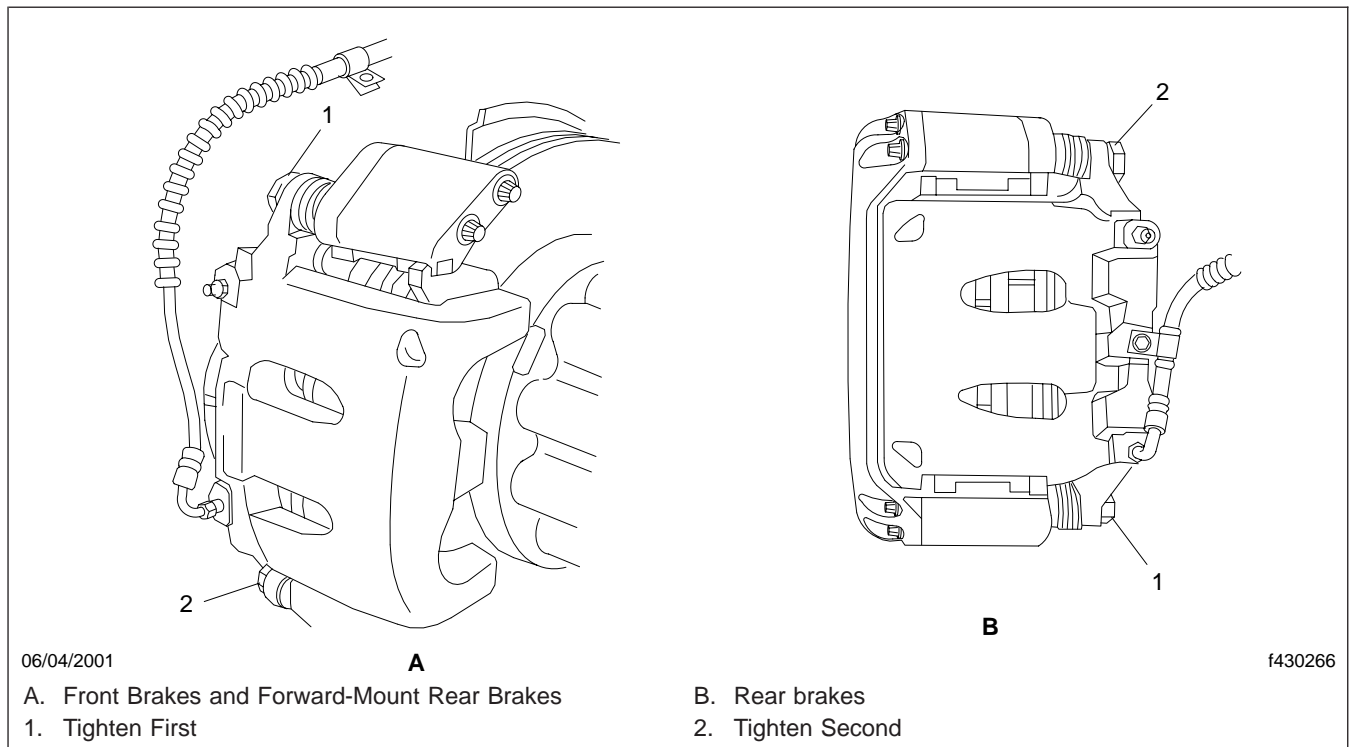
, Tightening Sequence for Caliper Mounting Bolts
